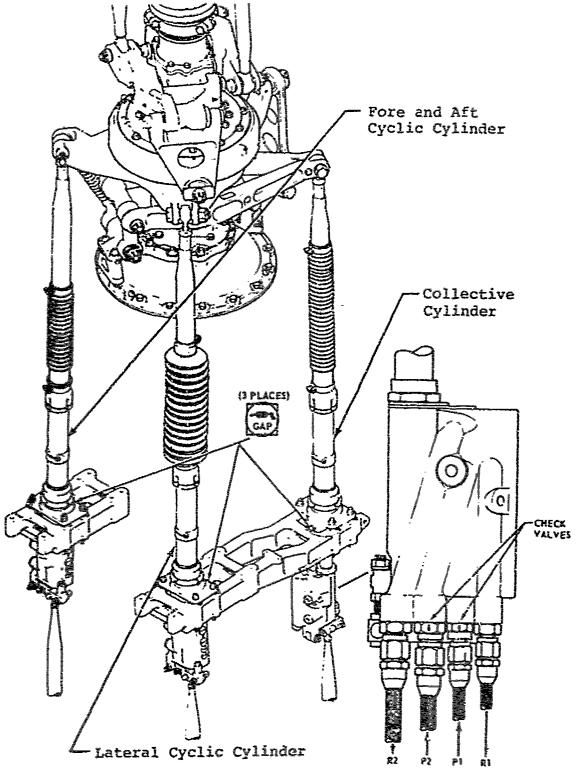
Flight Control Cylinder/Control Valve Installation, AE-1 Helicopter.
